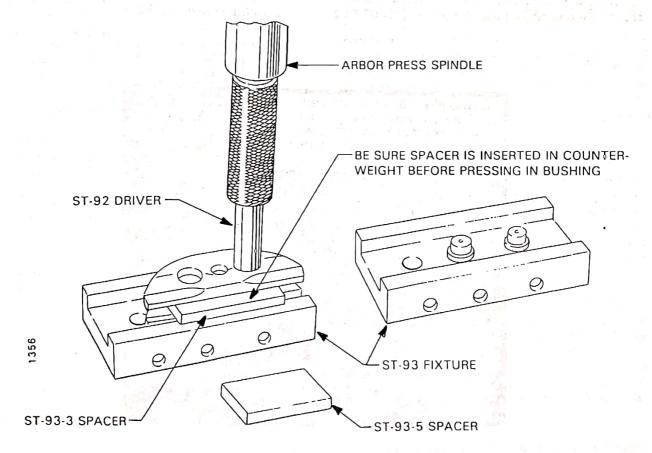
Installing Counterweight Bushing Using Fixture ST-93 and Driver ST-92
